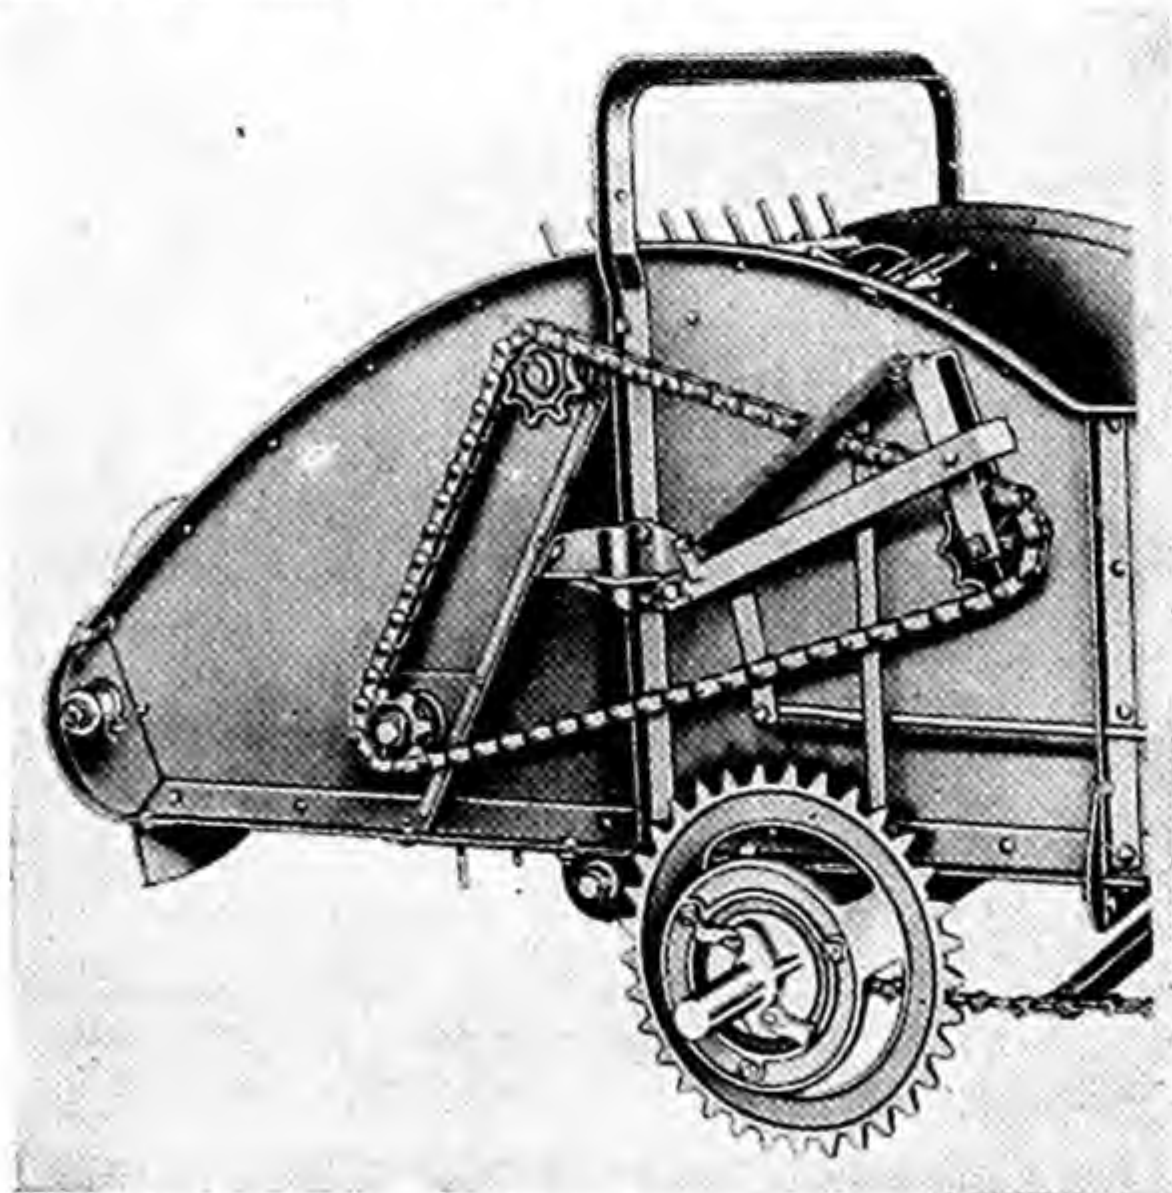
Lower and upper beaters are driven by large sprocket on main axle when chain is lowered enough to contact the top arc of the sprocket.
